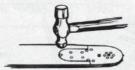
Punch out three rivets shown to remove sprocket nose on SP bar.
